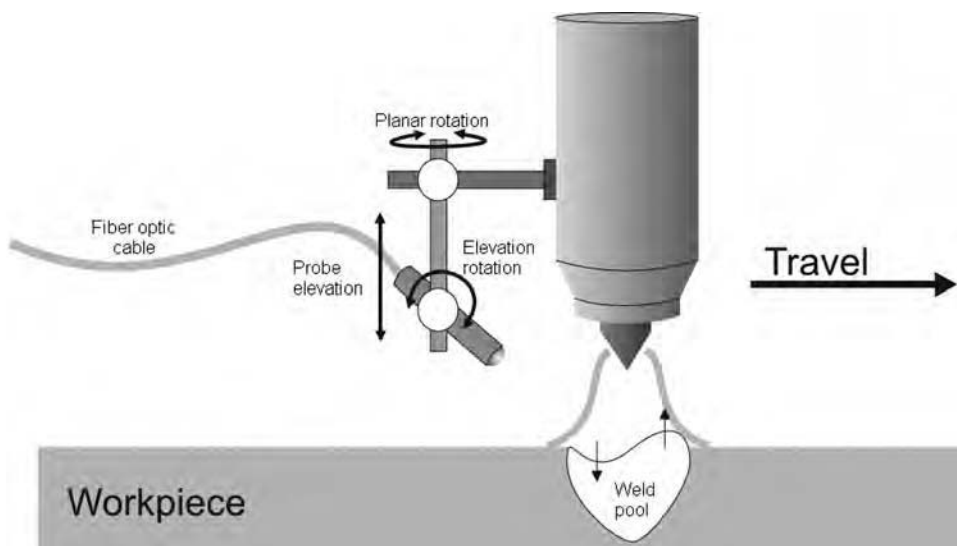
A nonimaging optical probe can be used to collect arc light from an arc welding process. The probe can be elevated and rotated depending on the light source of interest
